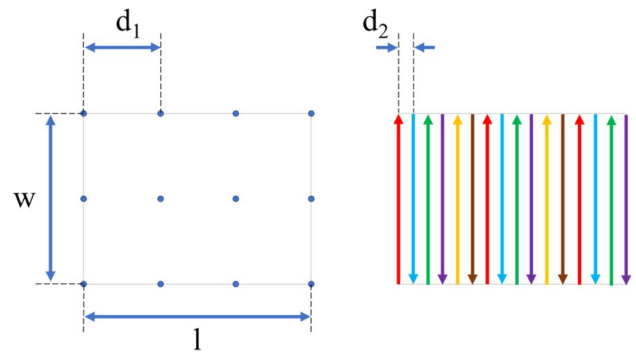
Illustration of foil sample dimensions and distances between laser spots in spot welding and between laser lines in pattern welding
